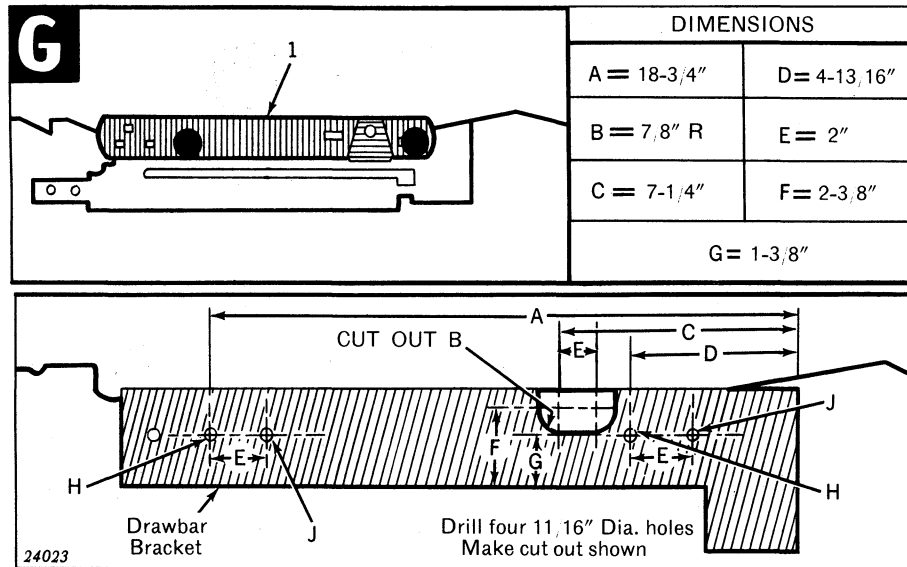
Draft Link Bracket Installed on Model "G" Tractors
